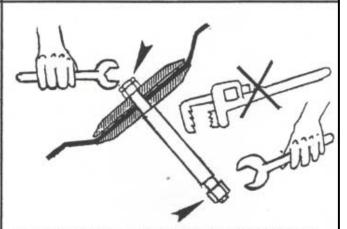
Avoid putting a pipe wrench directly on the shaft. Use a protective pad or reinstall the bottom shaft nuts to use as gripping nuts when loosening the top shaft nut.
